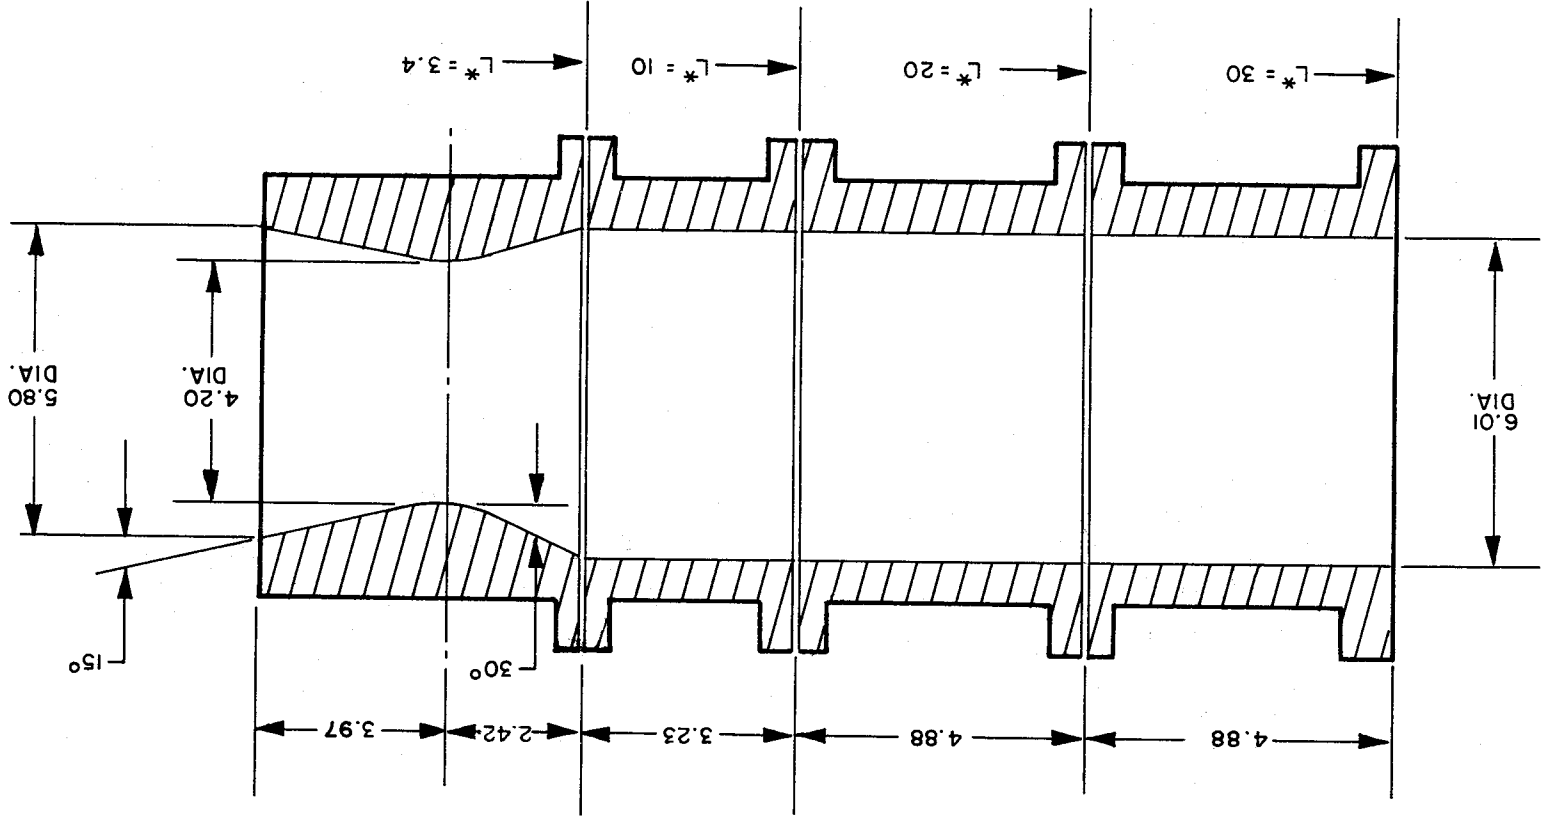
Thrust Chamber Schematic Showing Segmented Design and Dimensions.
